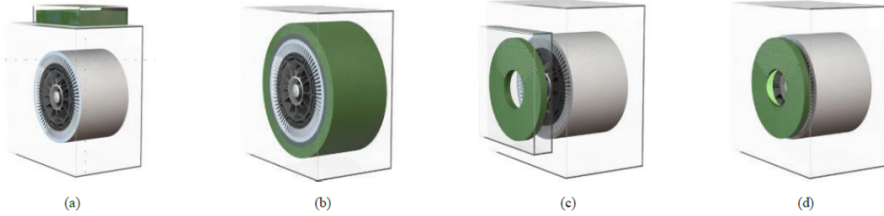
Overview of integration topologies: (a) Radial housing mount (b) Radial stator mount (c) Axial endplate mount (d) Axial stator mount [2]
